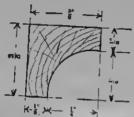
Section of End Panel Moulding of Portable Deek.
